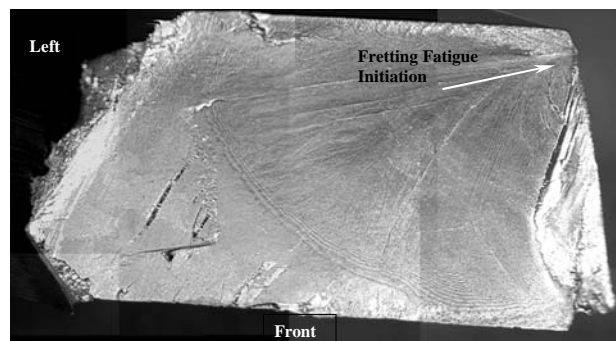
Fretting fatigue fracture surface 10X. Specimen ZOKKA.
